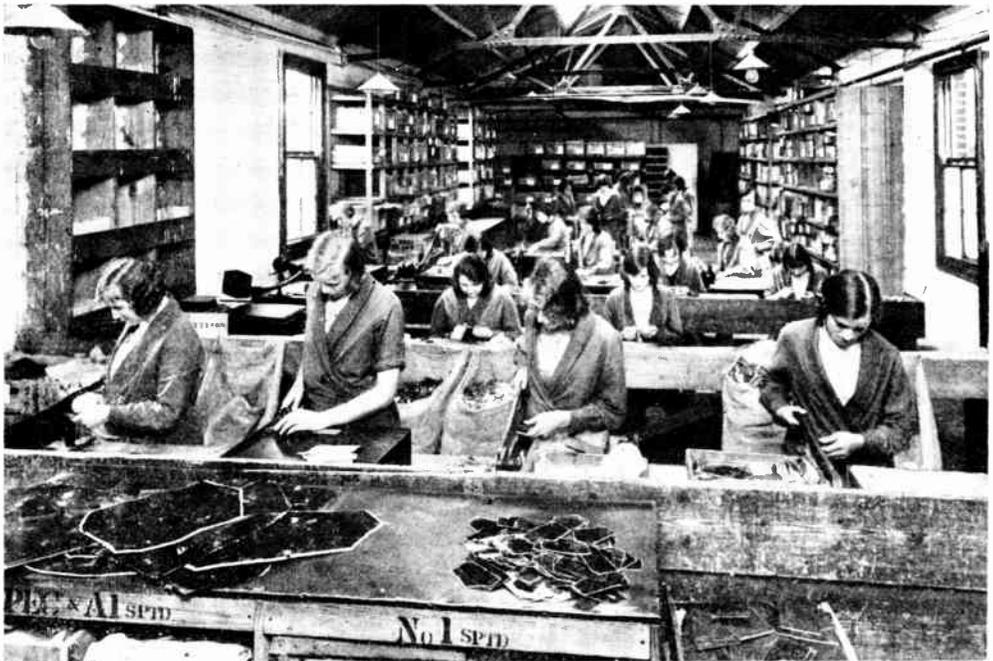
A TYPICAL WORKSHOP FOR THE PREPARATION AND MACHINING OF MICA. (*Micanite and Insulators Co., Ltd.*)
